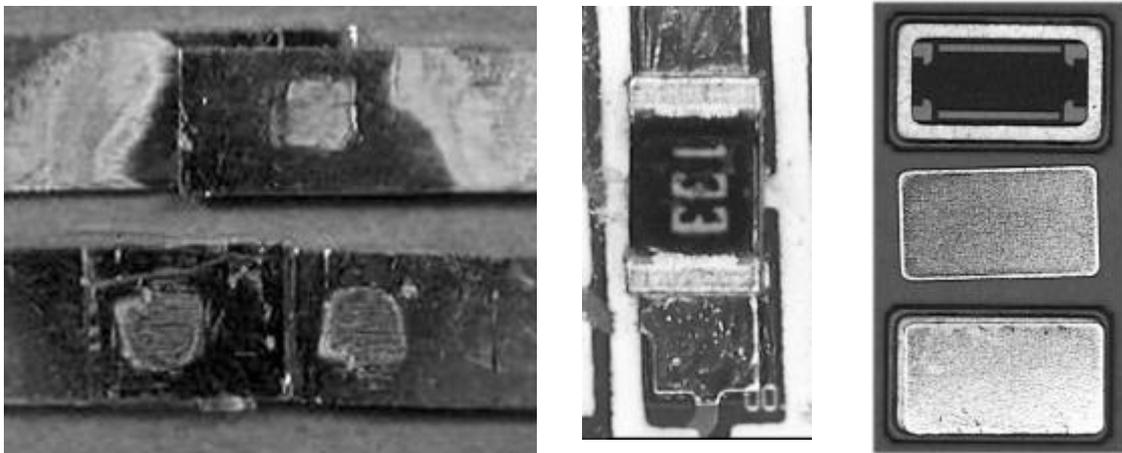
Aluminum plates welded by 100 kHz. Fig. 8. Tip element. Fig. 9. Ceramic package.
